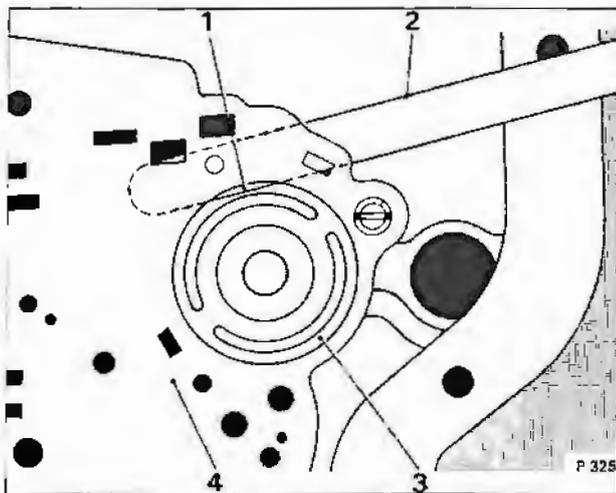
Method of temporarily holding front servo piston in position (transmission in car)
